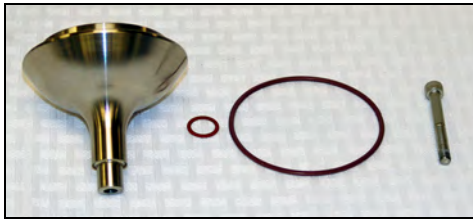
Nose, nose-to-cover o-ring, nose-to-canister o-ring, nose bolt
